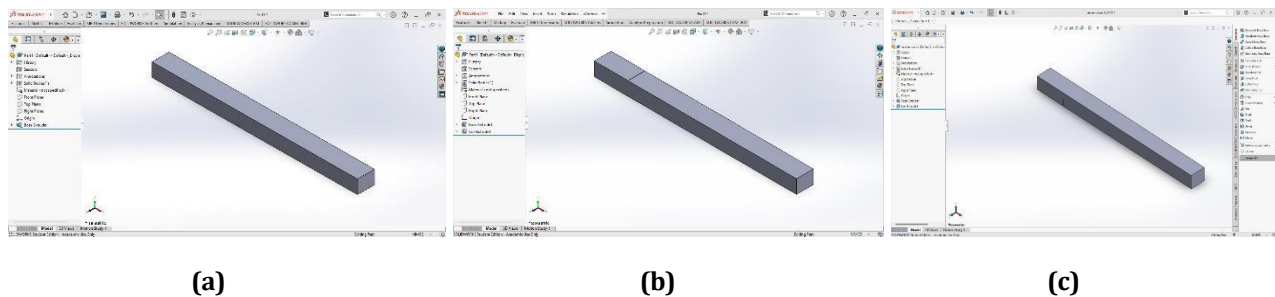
Uncrack beam(a), Top crack at 0.5m (b), Bottom crack at 0.5m(c)
